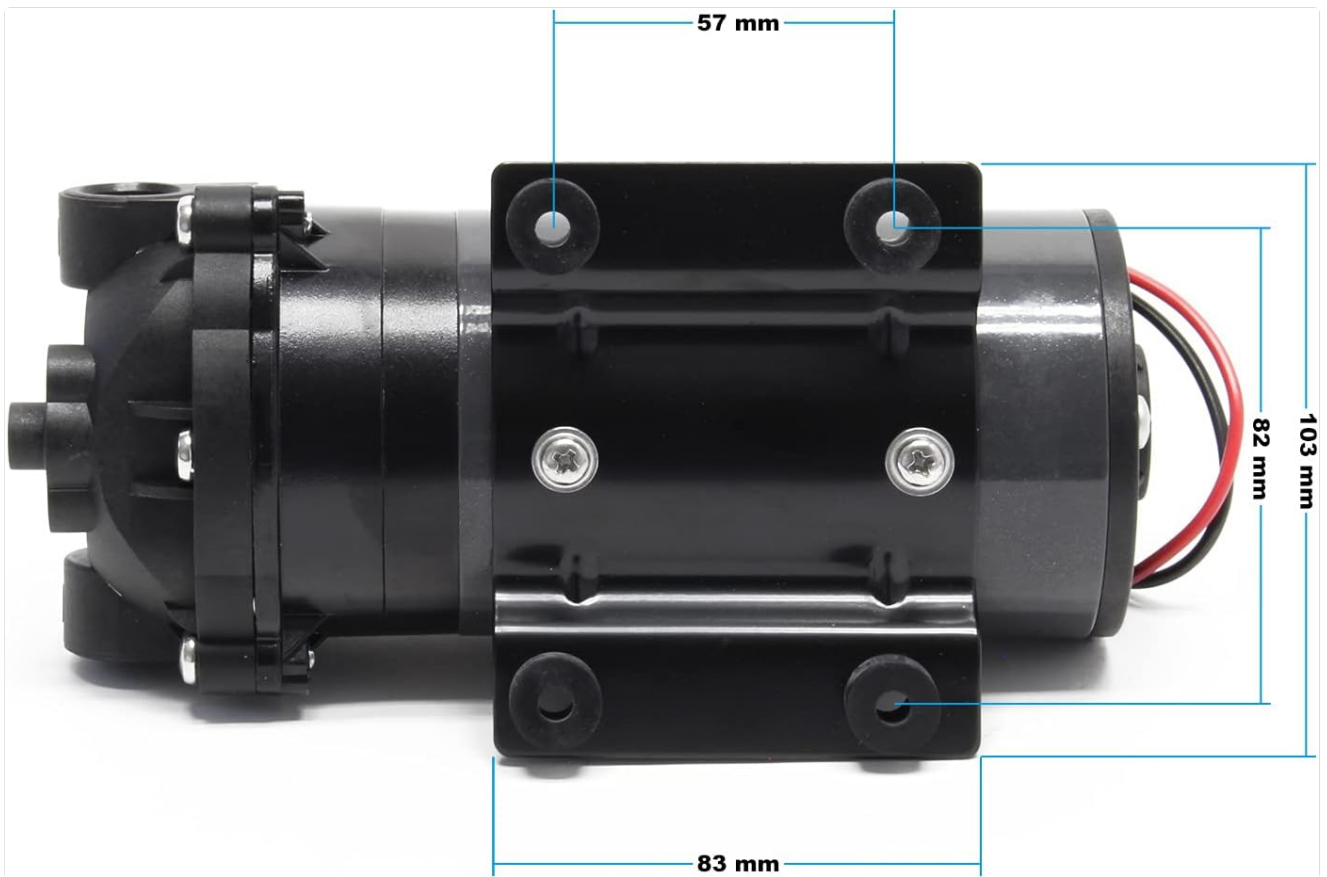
Side view with key dimensions (e.g., 57 mm, 82 mm, 103 mm).
